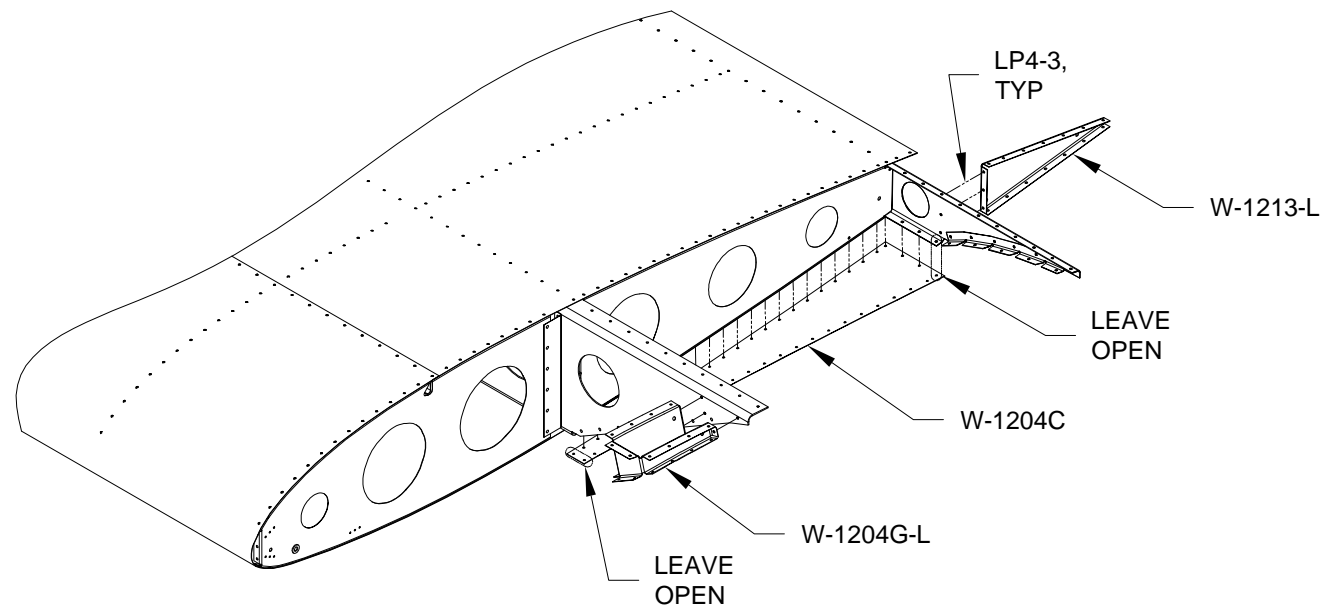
ATTACHING THE TIP RIB, HAND HOLD AND WING TIP BOTTOM SKIN
